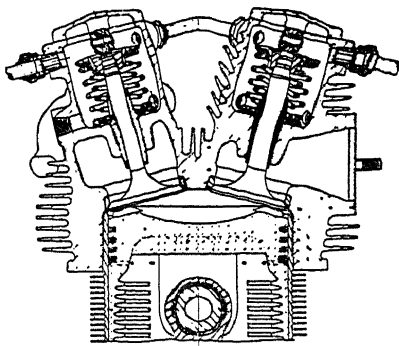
Cylinder head, showing valves and piston of Guiberson engine.
